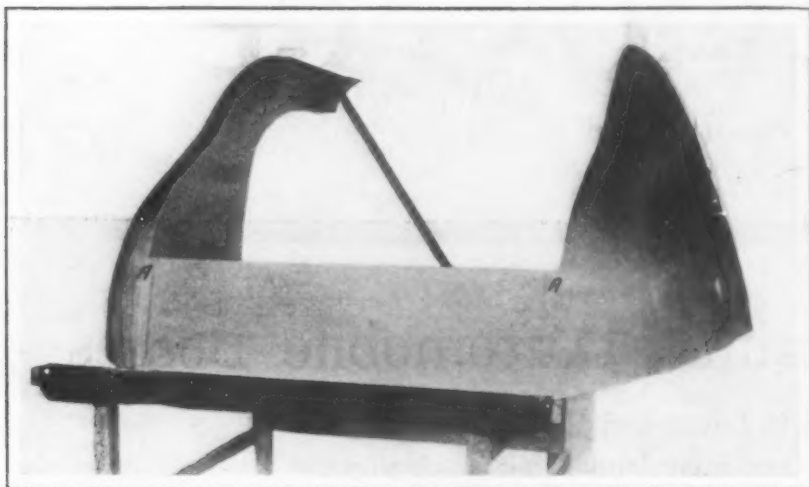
Back Quarter Panels of a Franklin Roadster Extending from the Door Opening on One Side Around Both Quarters and Across the Back, Which Was Welded Into One Piece at A in 4 Min.
